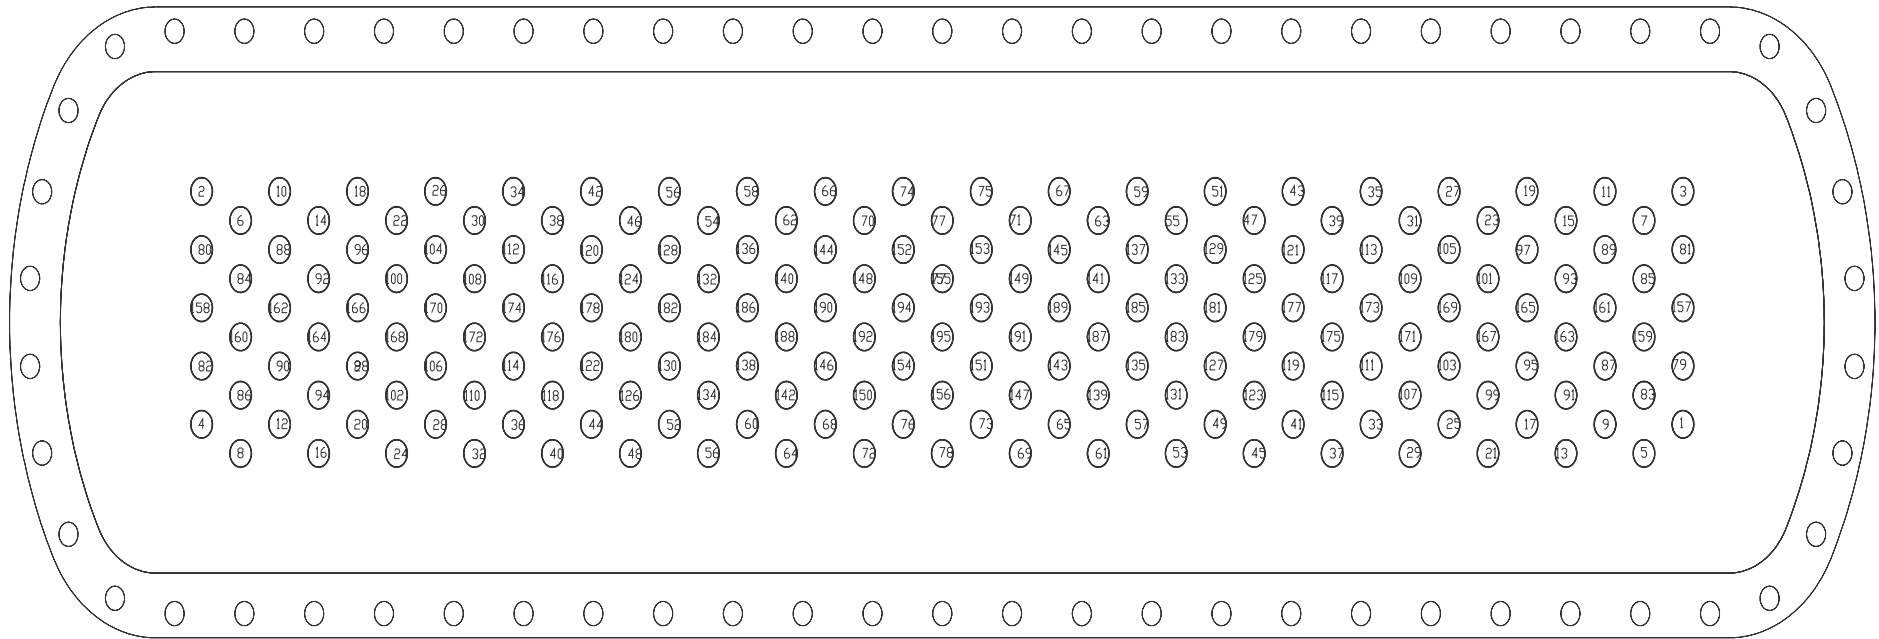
Recommended Welding Sequence to Minimize Distortion
